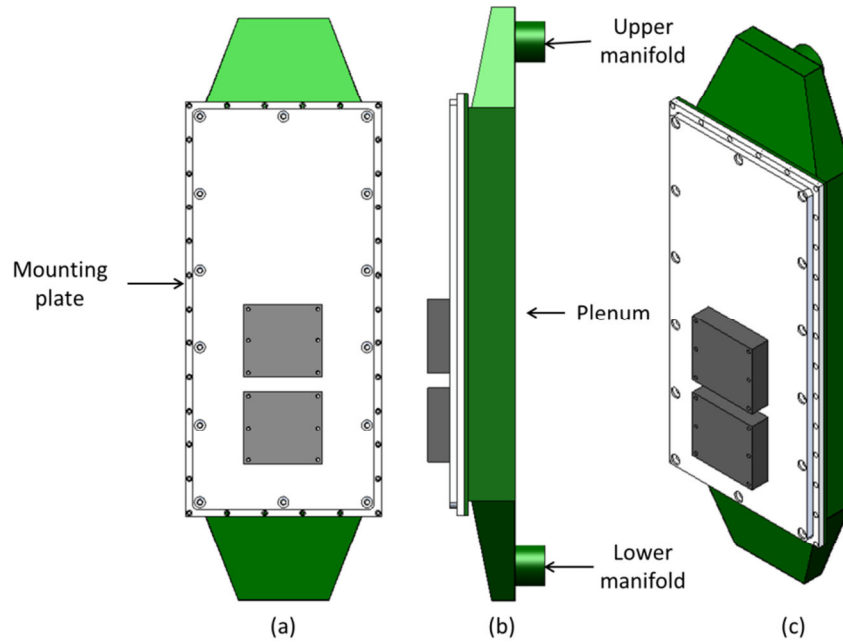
CAD model of the 1 MVA thermosiphon (a) front view, (b) side view and (c) isometric view
